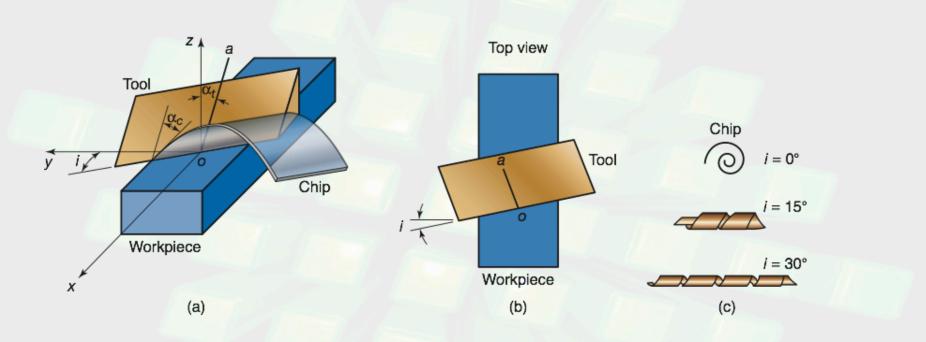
(a) Schematic illustration of cutting with an oblique tool. (b) Top view, showing the inclination angle, *i*. (c) Types of chips produced with different inclination angles.
